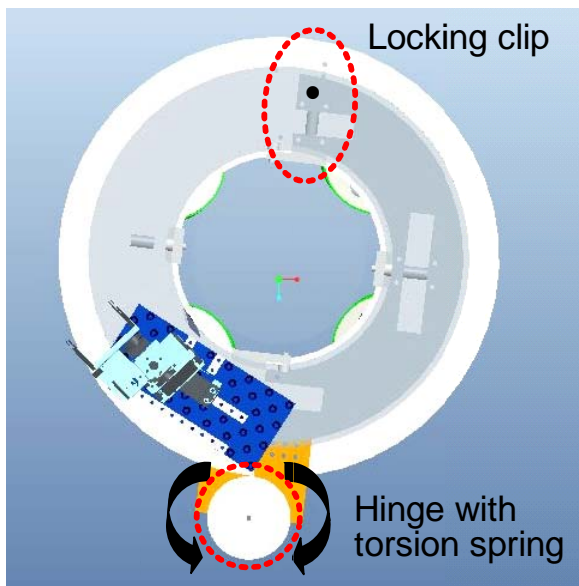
Assembly of two semicircular parts using a hinge and a locking clip
